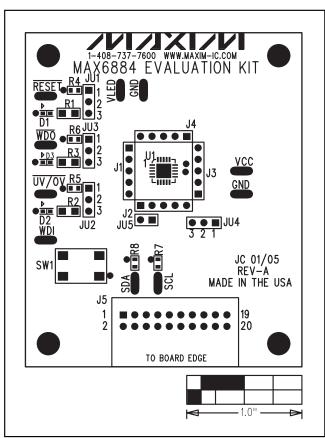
MAX6884 EV Kit Component Placement Guide— Component Side
